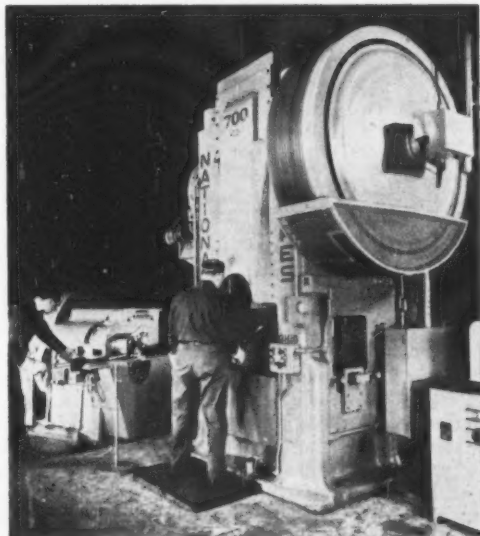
A Maxipres 700-ton Forging Press and a No. 4 Size Reduceroll Roll Forging Machine
